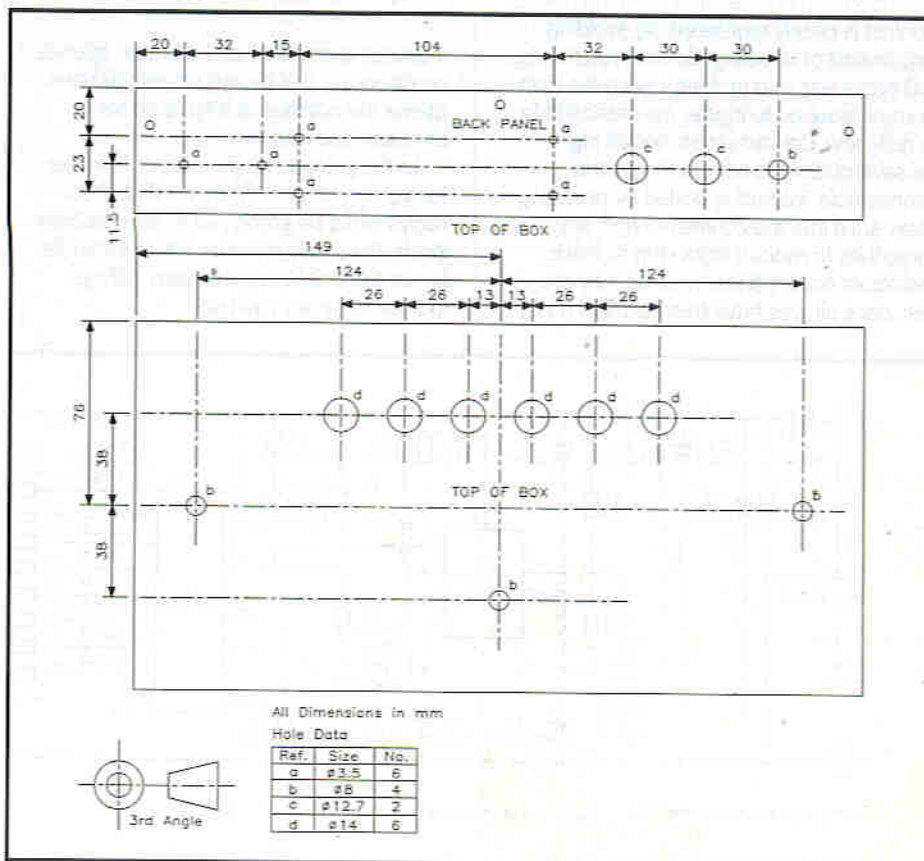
Box drilling details: (a) top of box; (b) rear of box.
